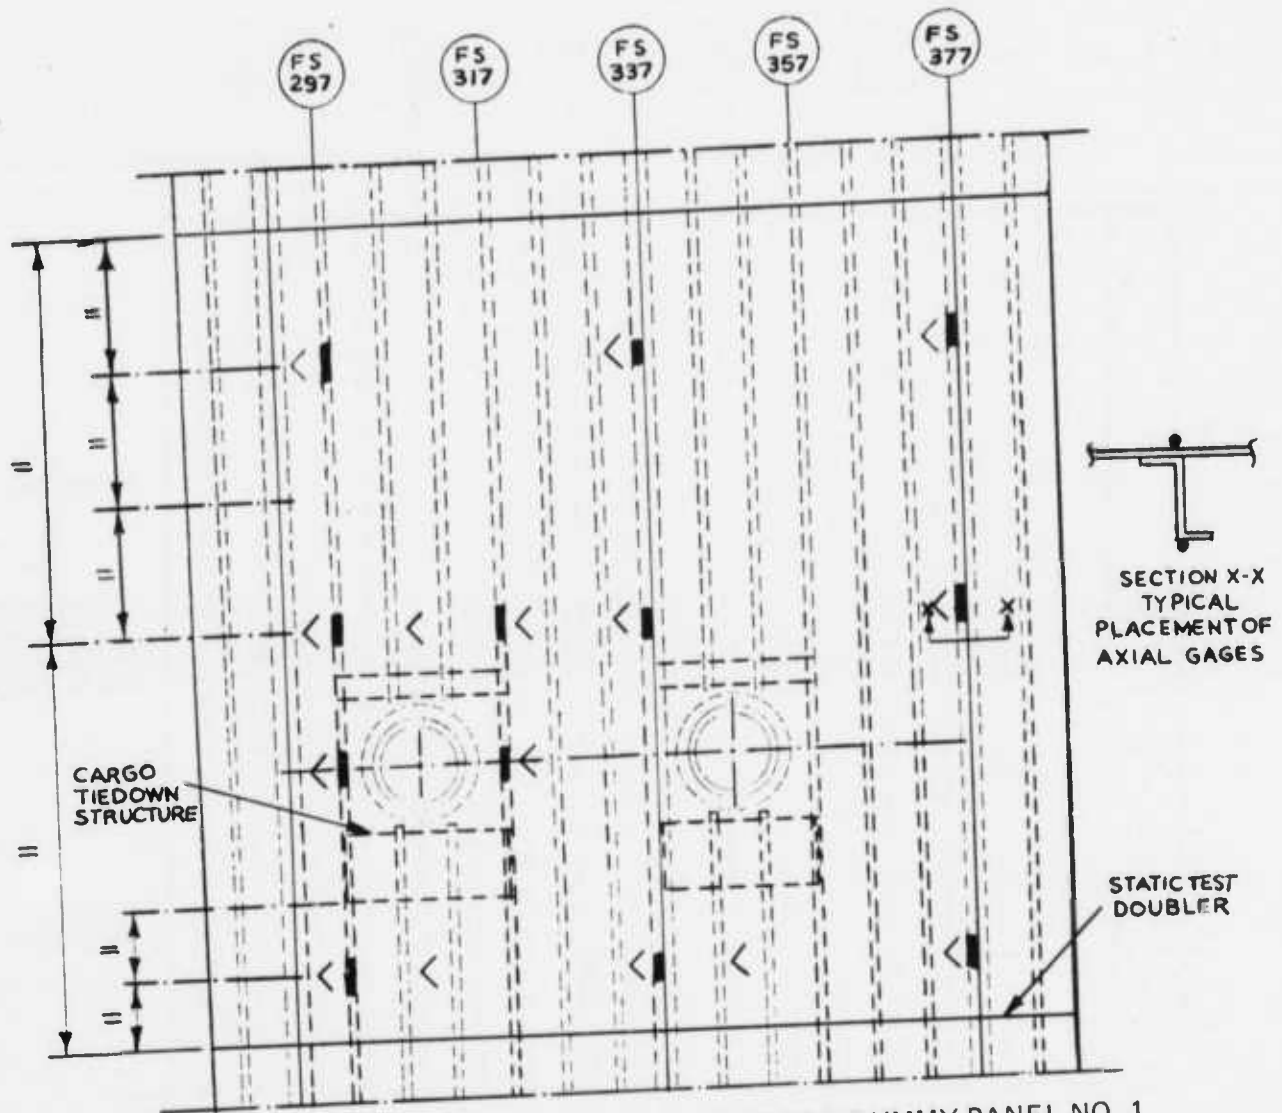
INSTRUMENTATION ARRANGEMENT FOR DUMMY PANEL NO. 1
